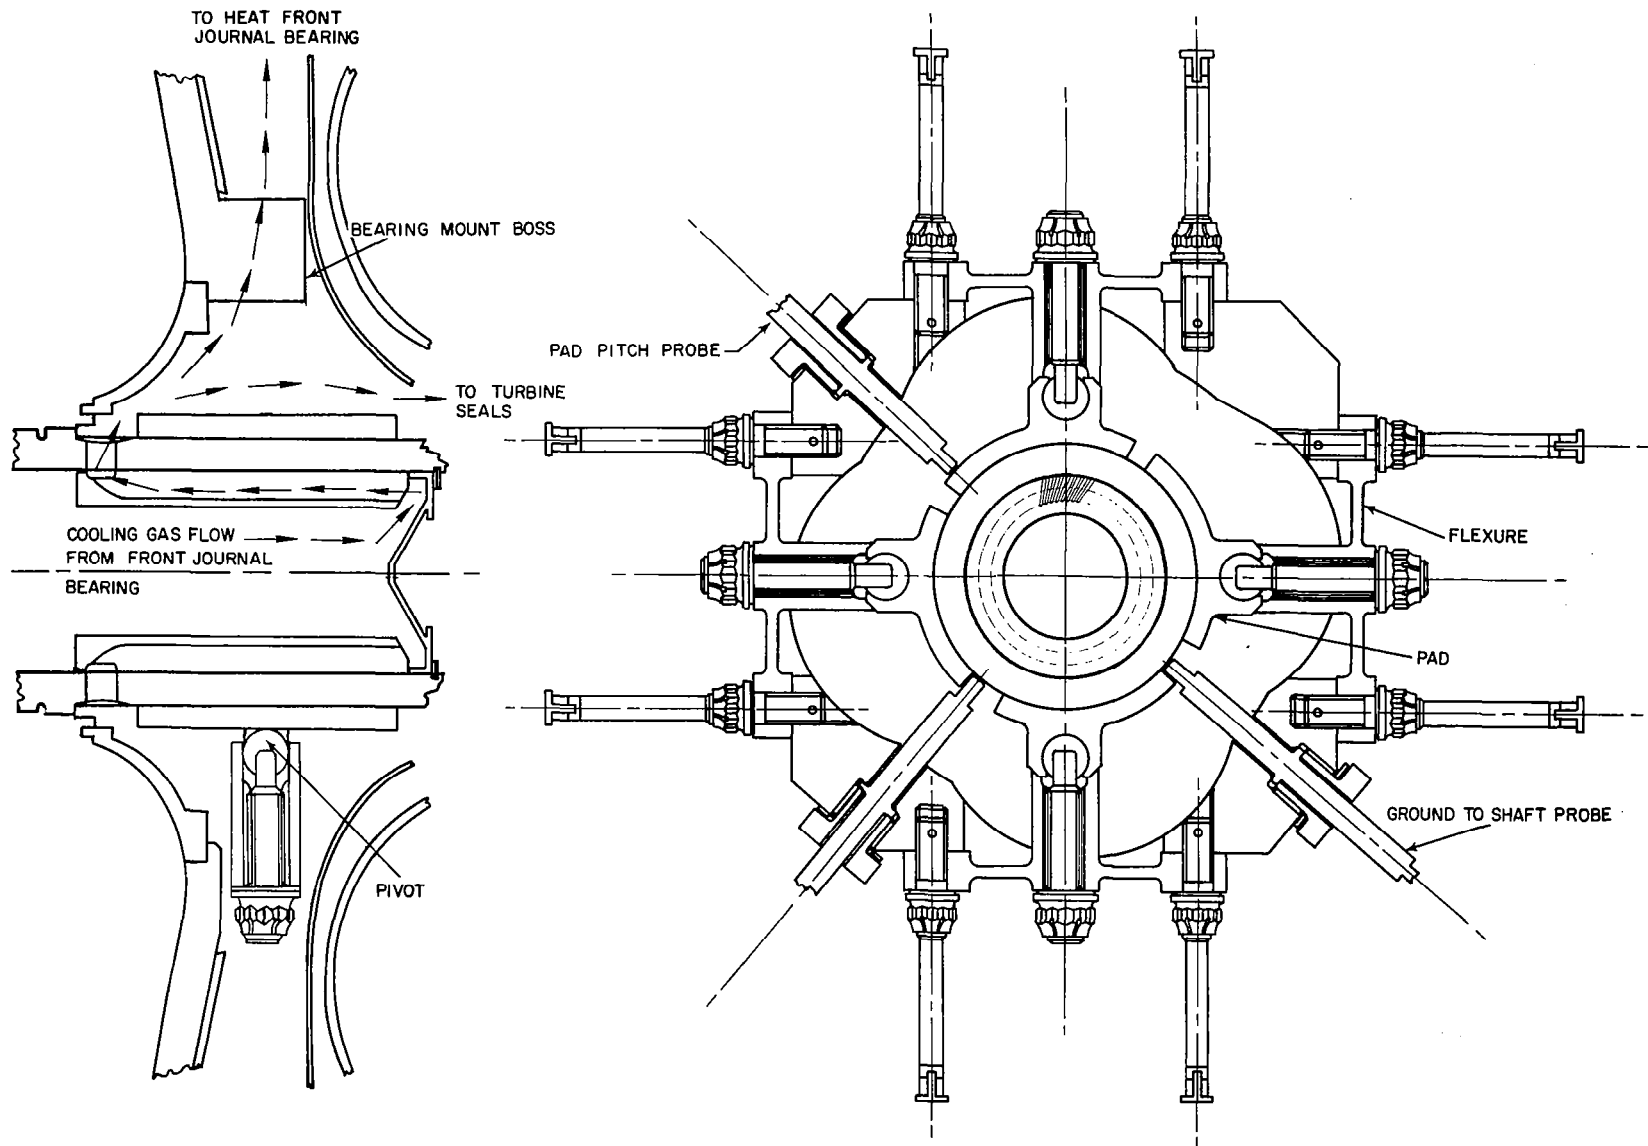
Turbine-Compressor Gas Bearing Design. No. 2 Journal Bearing
